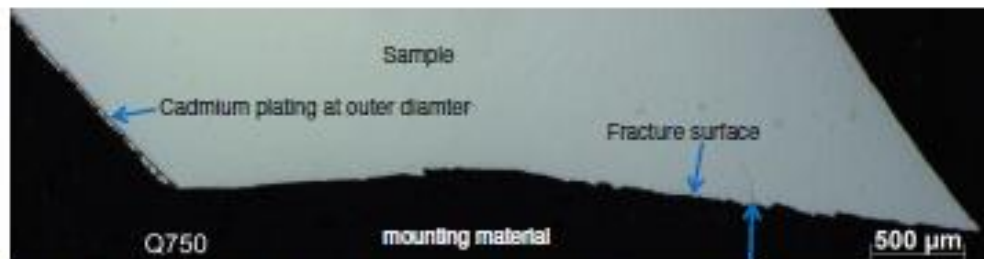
cross-sectional microsection of fuse fracture surface with a secondary crack
